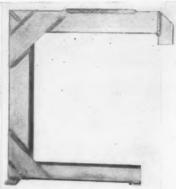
All Welded Steel Frame for the Parks Woodworking Machine Co., Cincinnati, Obio. Sides are brake formed from 12 gauge metal.
